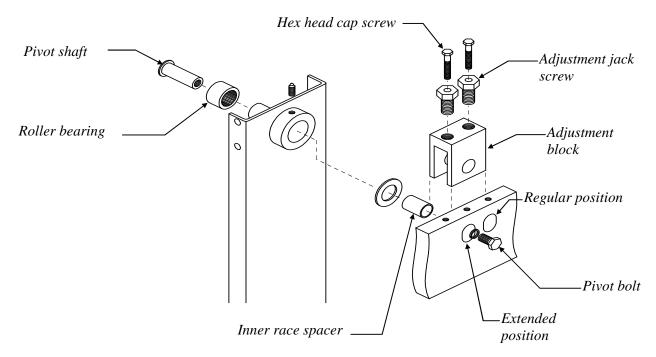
Product Holder Box Pivot Point - Hydraulic Machines
